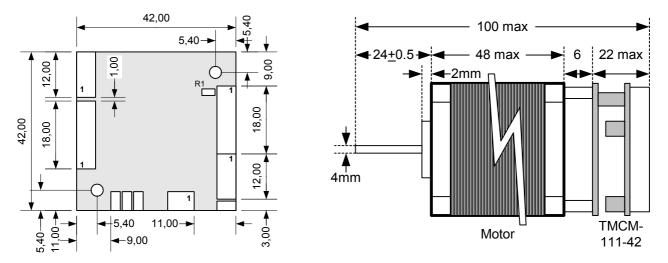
Dimensions of PD-111-42 and TMCM-111-42 (all dimensions in millimeters)
